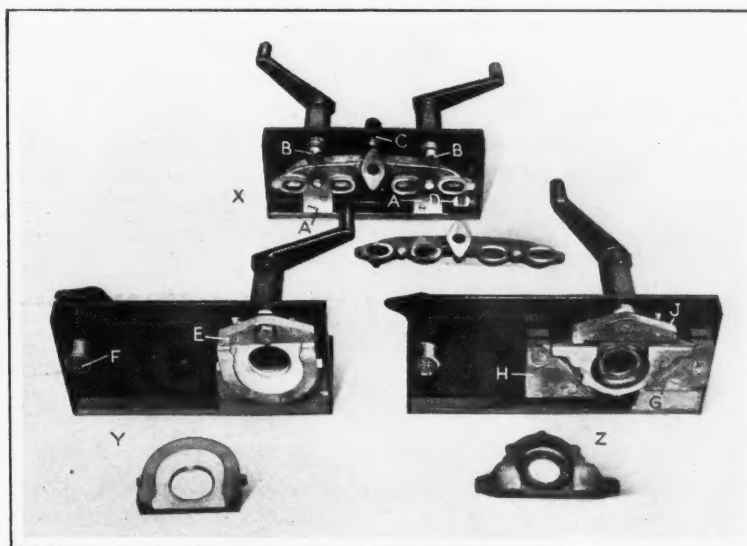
Three Fixtures Employed in Grinding Parts for Yellow Sleeve-Valve Engines
